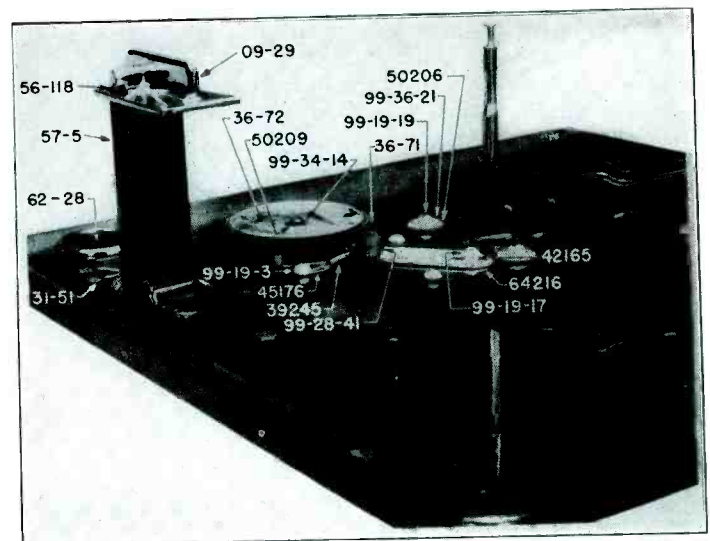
Record changer with turntable removed, showing mechanism above motor-board.
